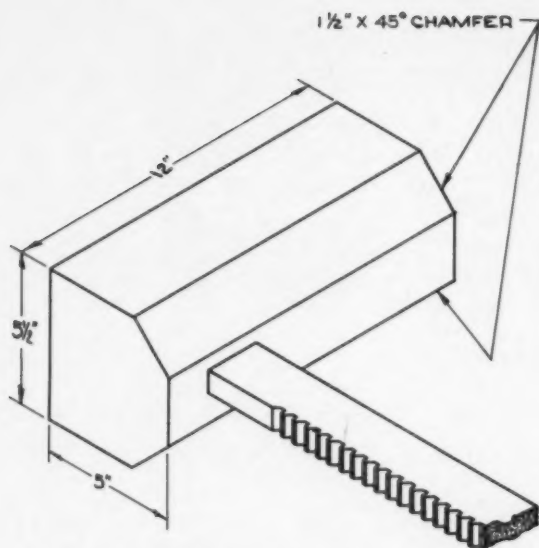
Approximate dimensions of new type Universal Wheel Chock (carrier) FSN RM 1730-974-4166-S030.
